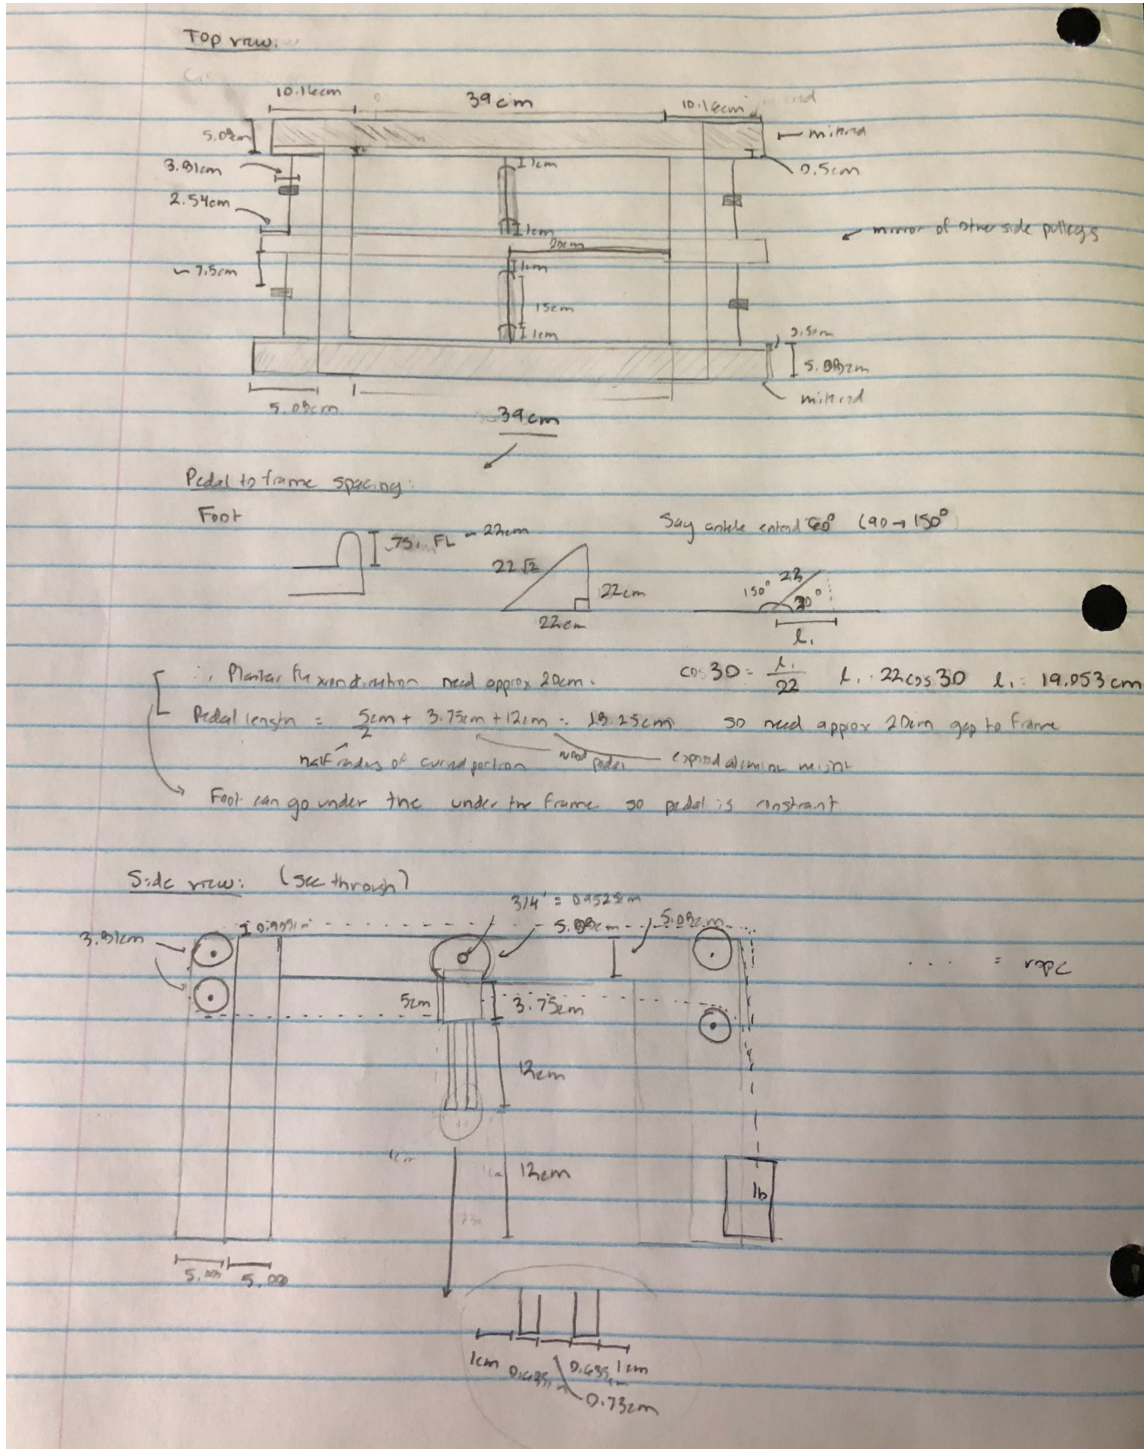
Sketch of ergometer pedal housing design, page 2
